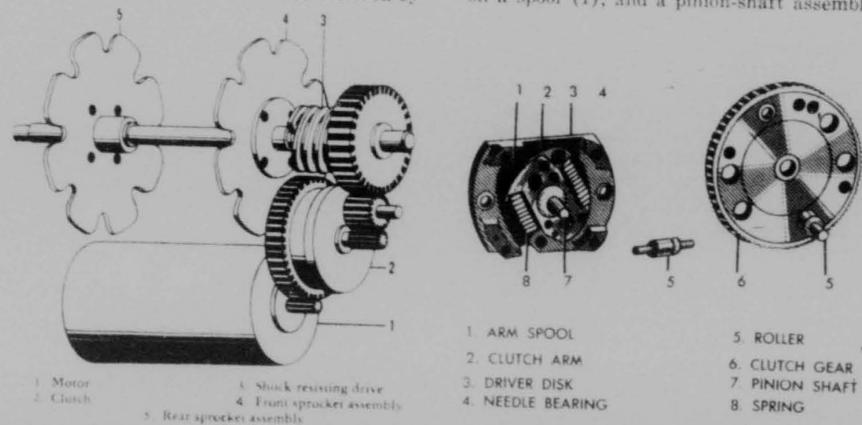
Schematic Diagram of Ammunition Booster Gear Train.
